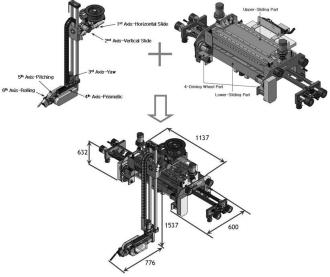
Combination of 'Rail Runner' platform and '3P3R' manipulator for welding
